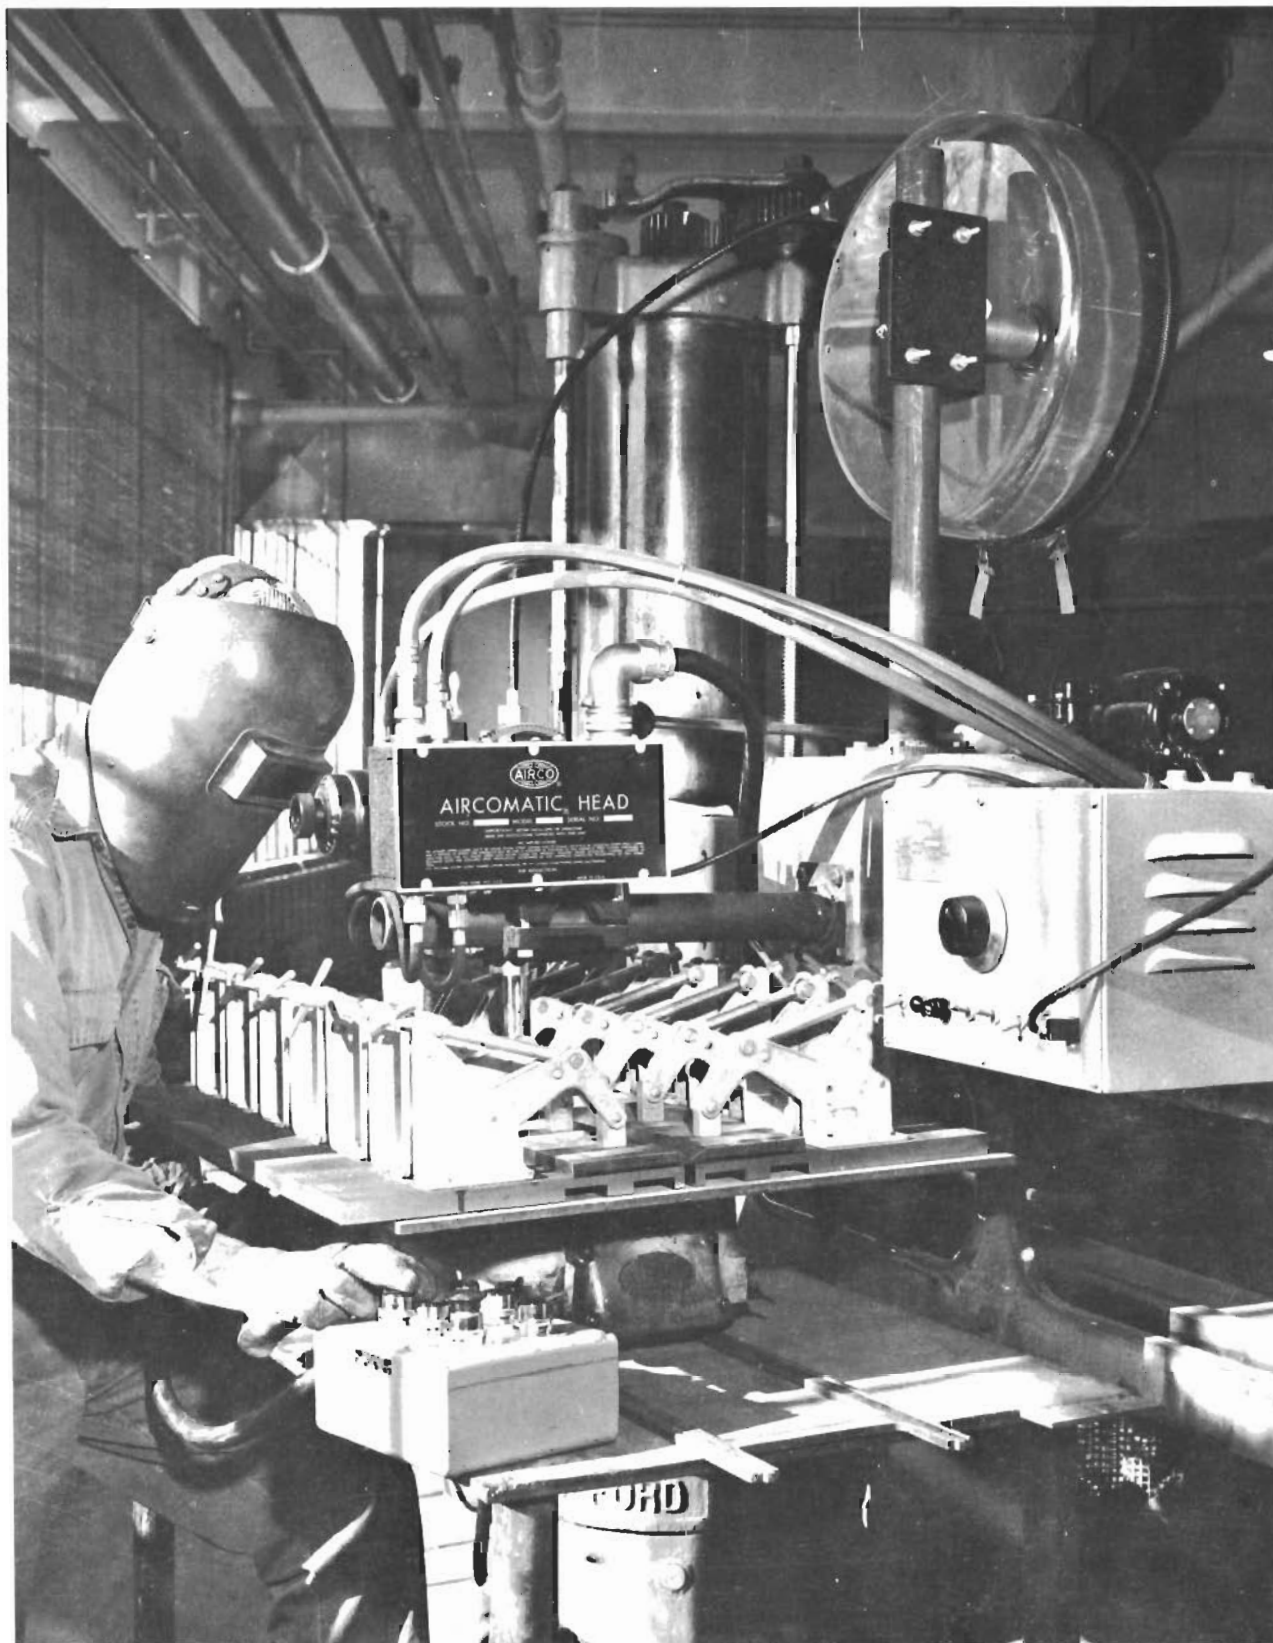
INERT-GAS CONSUMABLE-ELECTRODE WELDING PROCESS
